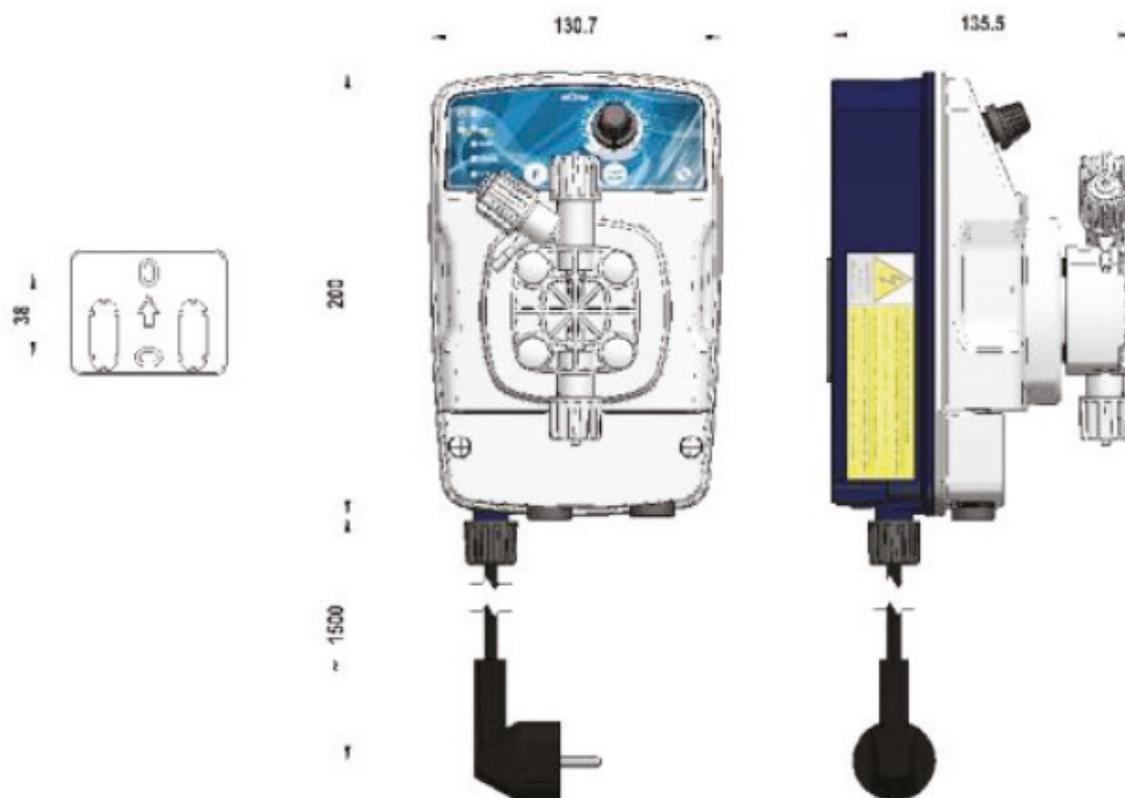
Dimensions in mm. Plate for wall mounting.
